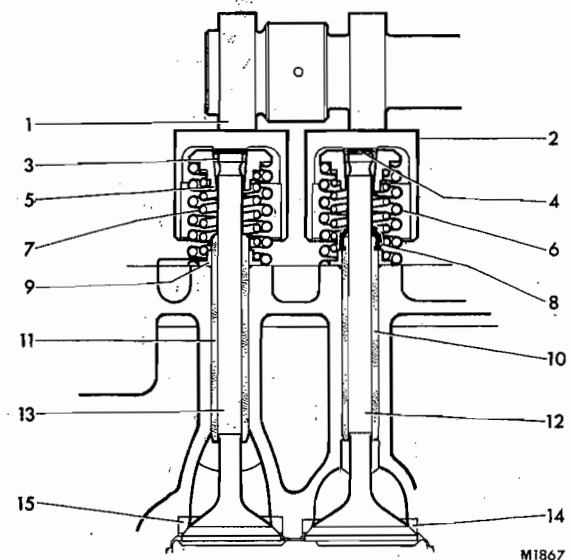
SECTIONED VIEW OF VALVES AND SPRINGS
